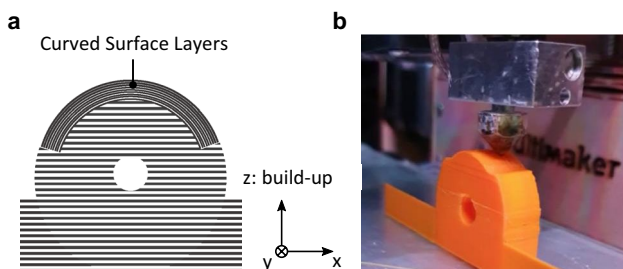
a Curved Layer Printing principle. b Practical printing test specimen
